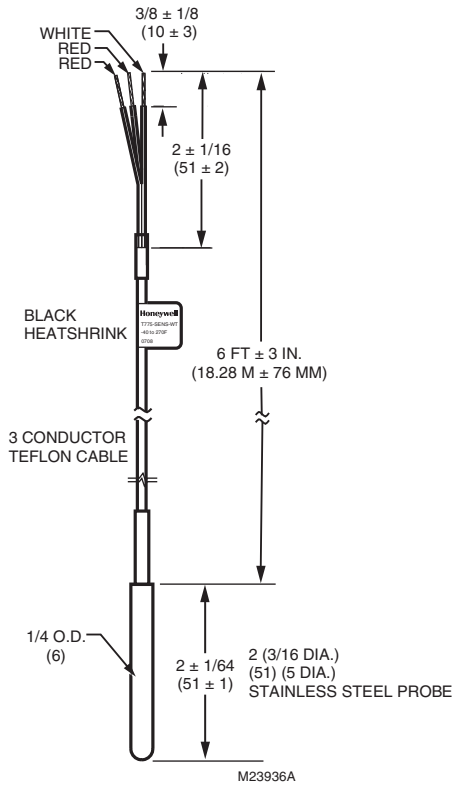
T775-SENS-WT Dimensions in Inches (mm).
